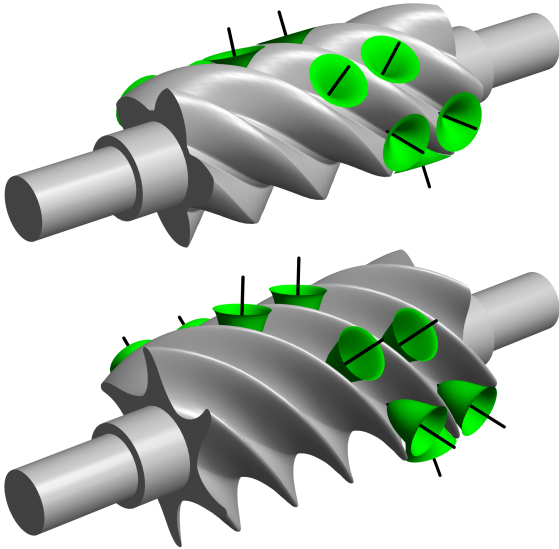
Approximate single-flank milling with one custom-shaped tool of male and female screw rotors ('N' profile, Stosic, 1996) from Example 4.9. Several positions of the custom-shaped tools are shown.
